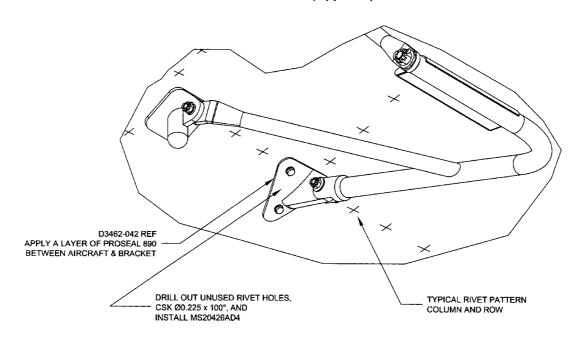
Detail View D3462-042 Bracket Assembly (-032 Installation, Shown) D3462-041, (-031 Installation Opposite)
